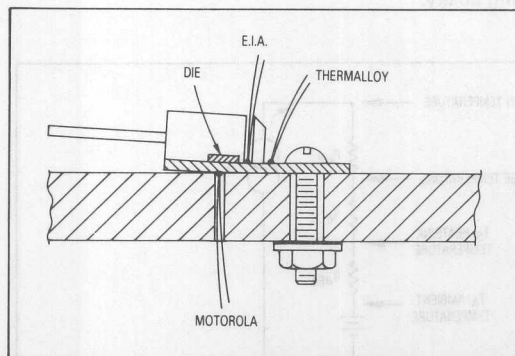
JEDEC TO-220 Package Mounted to Heatsink Showing Various Thermocouple Locations and Lifting Caused by Pressure at One End
